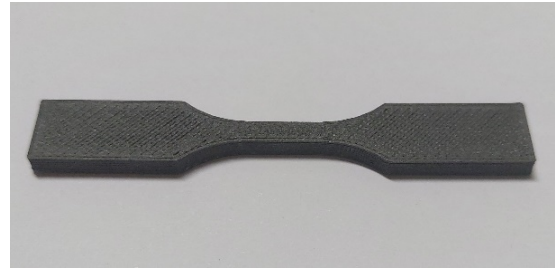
Specimen printed using FDM-type 3D printer GIANTBOT G5 Plus
